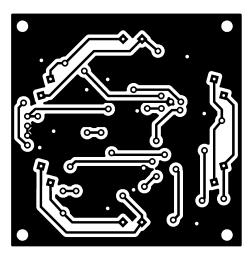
Ultrasonic transmitter PCB layout (Top and Bottom)
